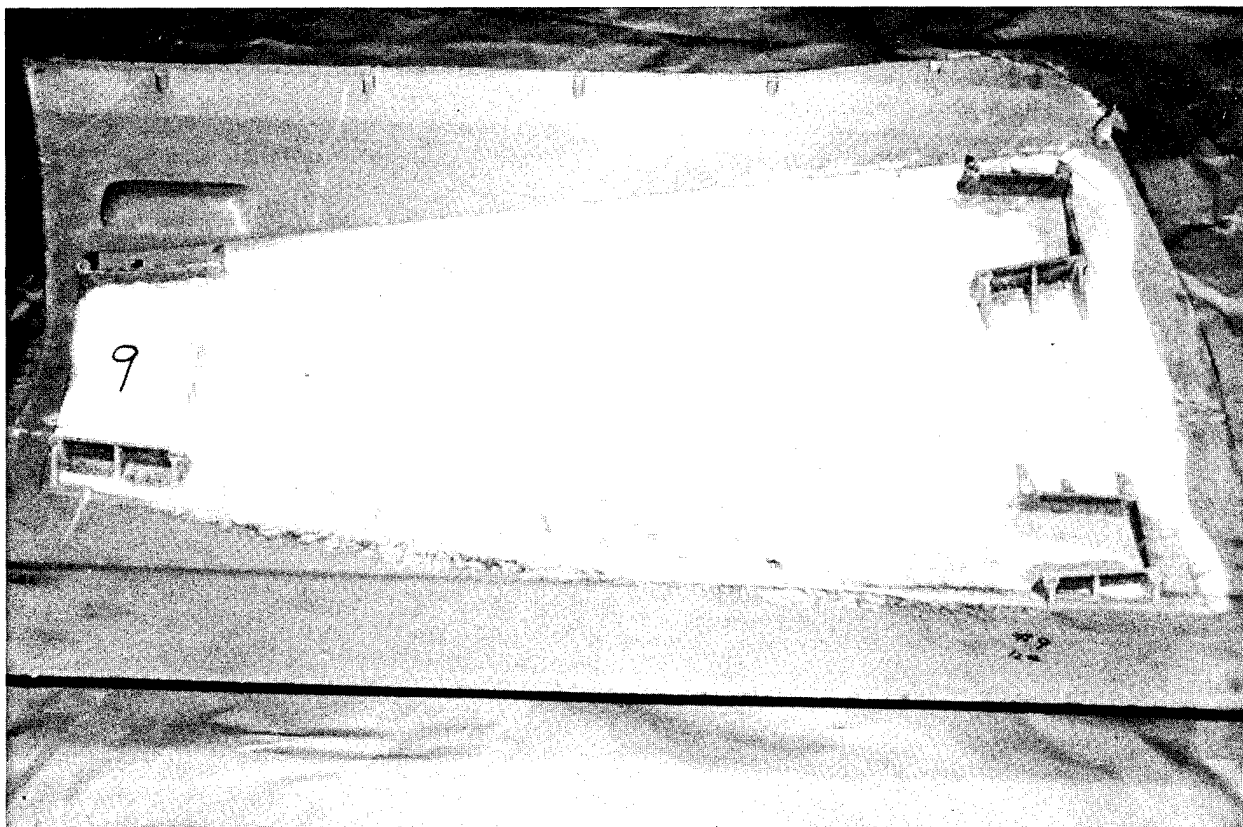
PROTOTYPE PART AS IT COMES FROM THE ZINC ALLOY MOLD AND PRIOR TO TRIMMING
